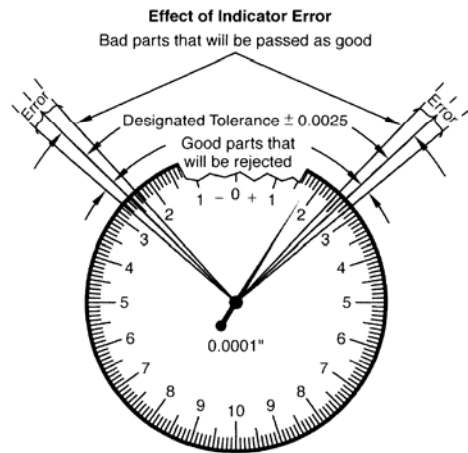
This exaggerated drawing shows that indicator error causes bad parts to be accepted and good parts to be rejected when used for production inspection.
